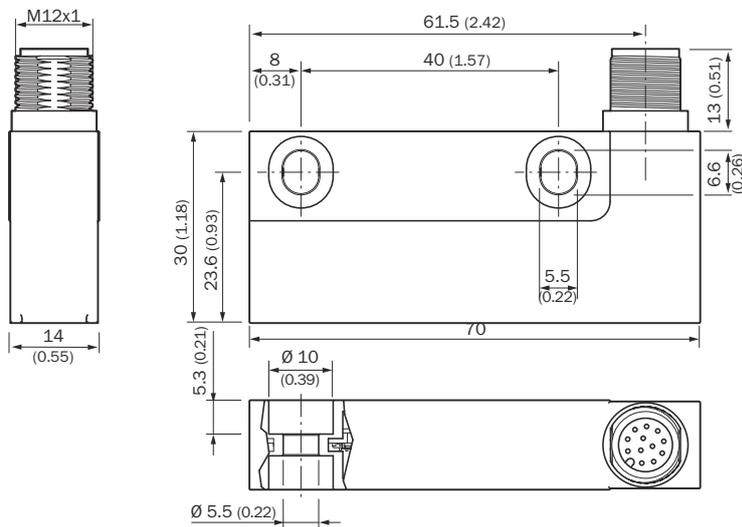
Dimensional drawing TTK70 with M12 male connector (all dimensions in mm)
